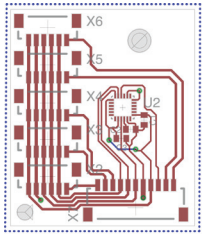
Wrist Board PCB Layout. 1:1 scale image of the PCB layout for the sensor board for the back of the hand.
